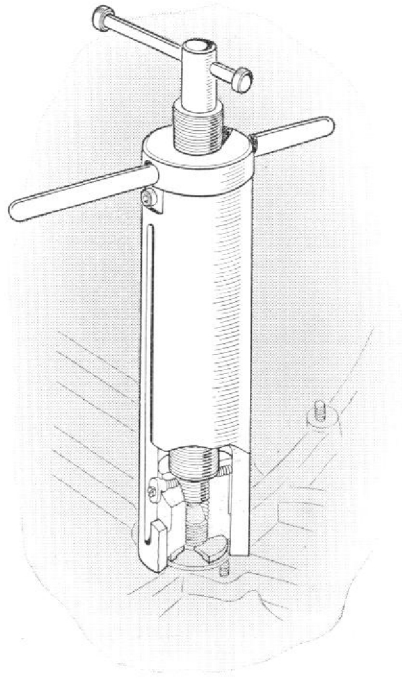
Extractor T.76529 for removing hollow diffuser bolts.
